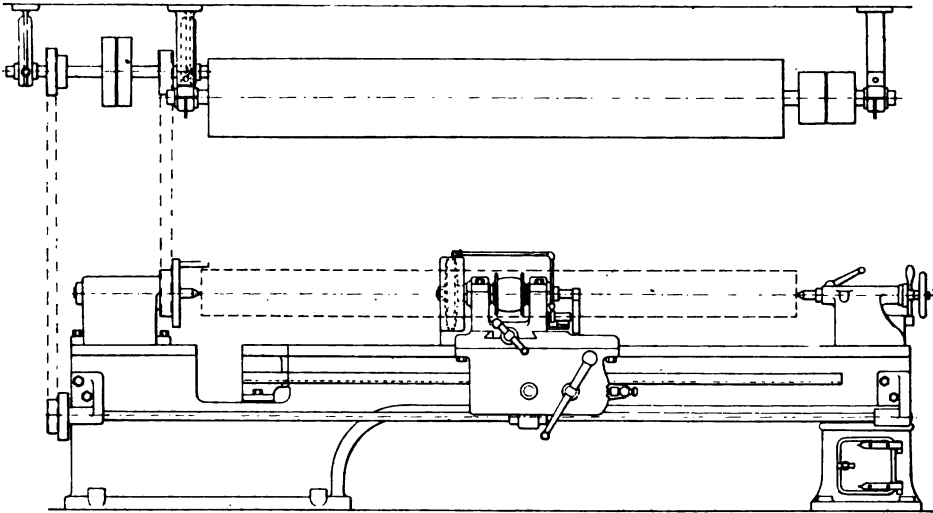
GRINDING MACHINE FOR SHAFTS UP TO 8 INCHES IN DIAMETER AND 8½ FEET LONG.
